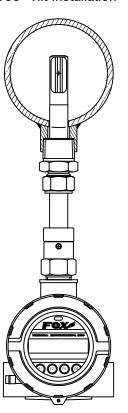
Insertion Meter with Retractor Dimensions Measurements shown in inches (millimeters).
